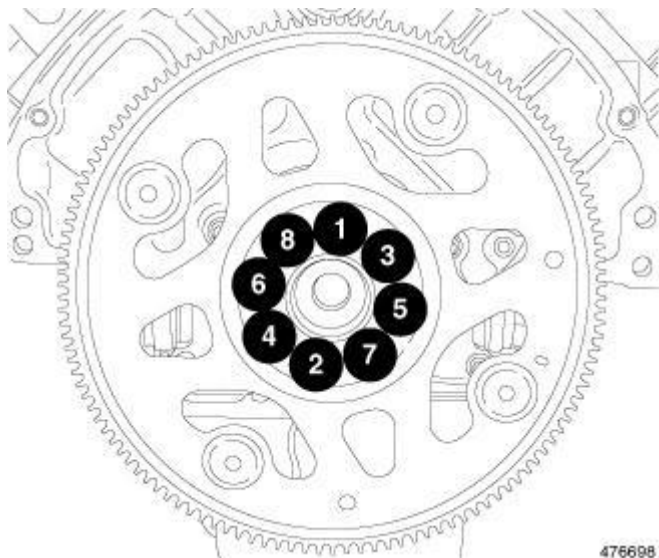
Flexplate Retaining Bolt Removal & Tightening Sequence
